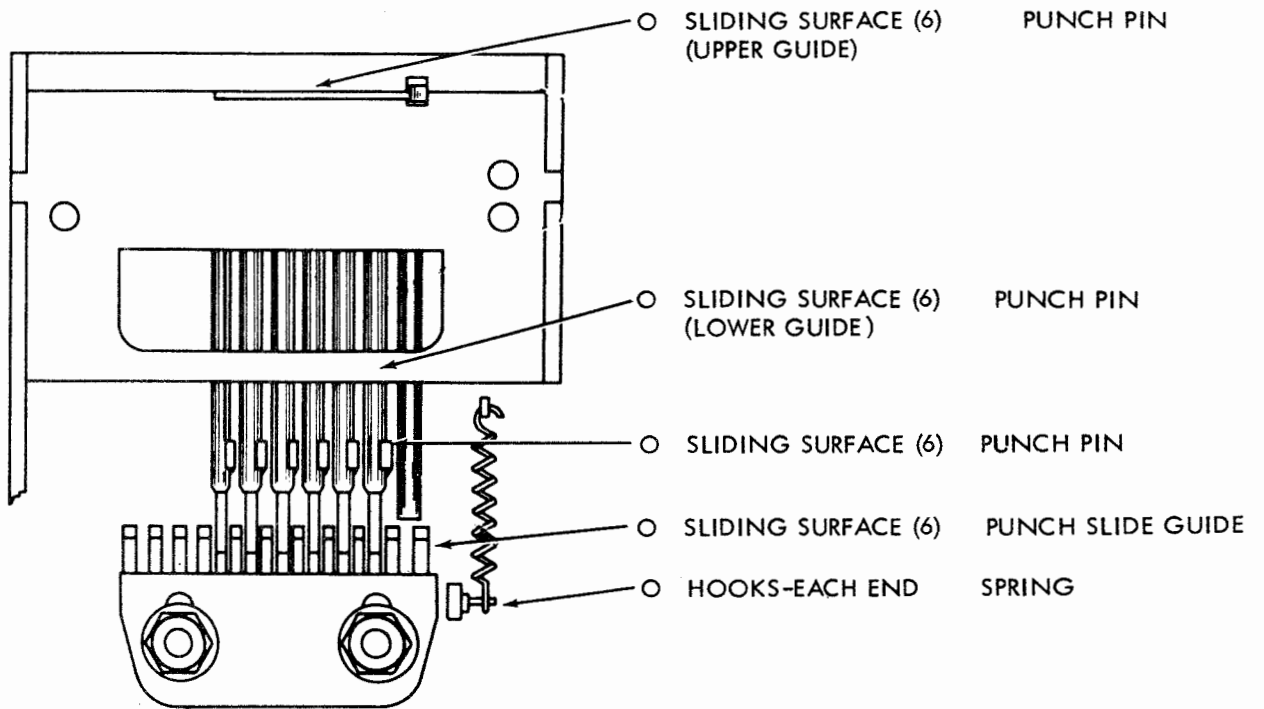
A. TYPING REPERFORATOR TT-373/UG, AND TT-375/UG LUBRICATION - PERFORATOR MECHANISM
